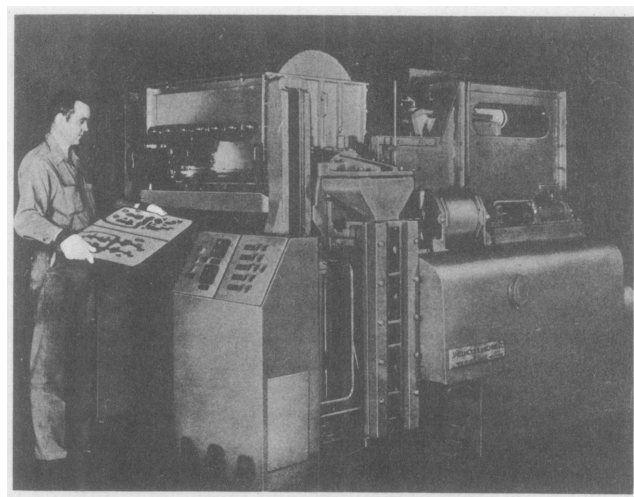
Automatic shell production machine, Model SU-1, manufactured by Shellmold & Machine Co., Inc., New York, N. Y.
